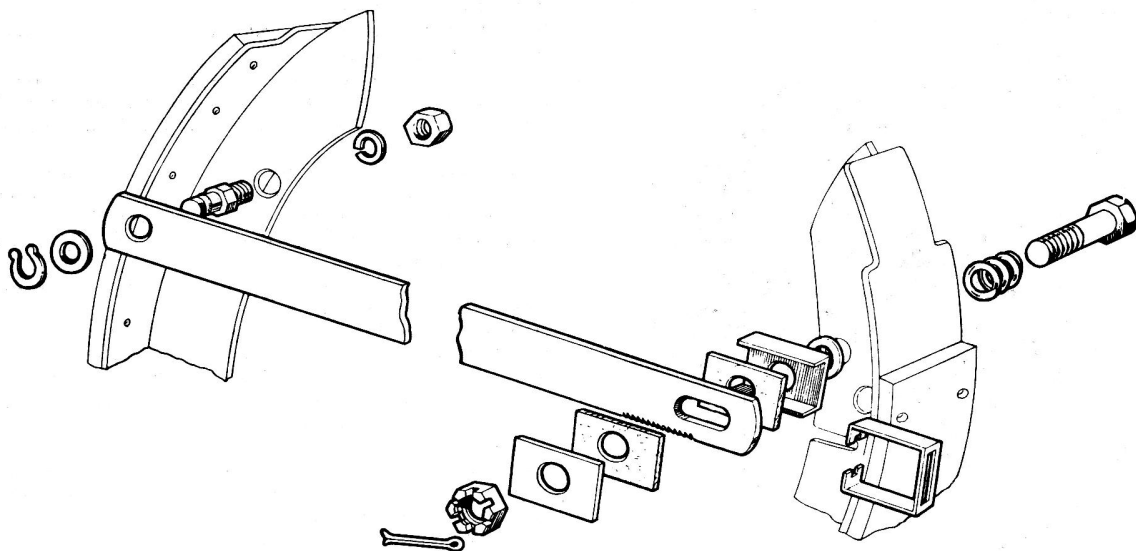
Adjuster bar arrangement (right hand front illustrated)
